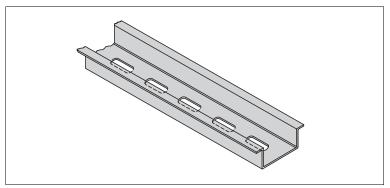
Example: DIN mounting rail UPR-MR (35 mm x 15 mm)
